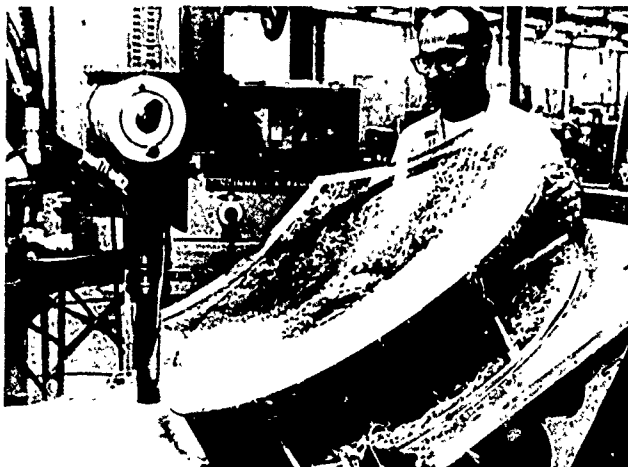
Milling the edges of spherical pentagon for the 66 inch diameter capsule.
